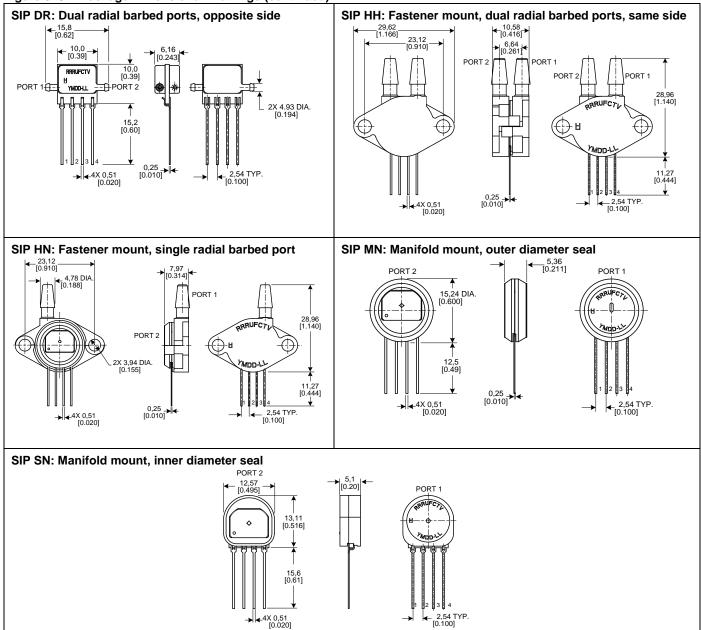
SIP Package Dimensional Drawings (For reference only: mm [in])
